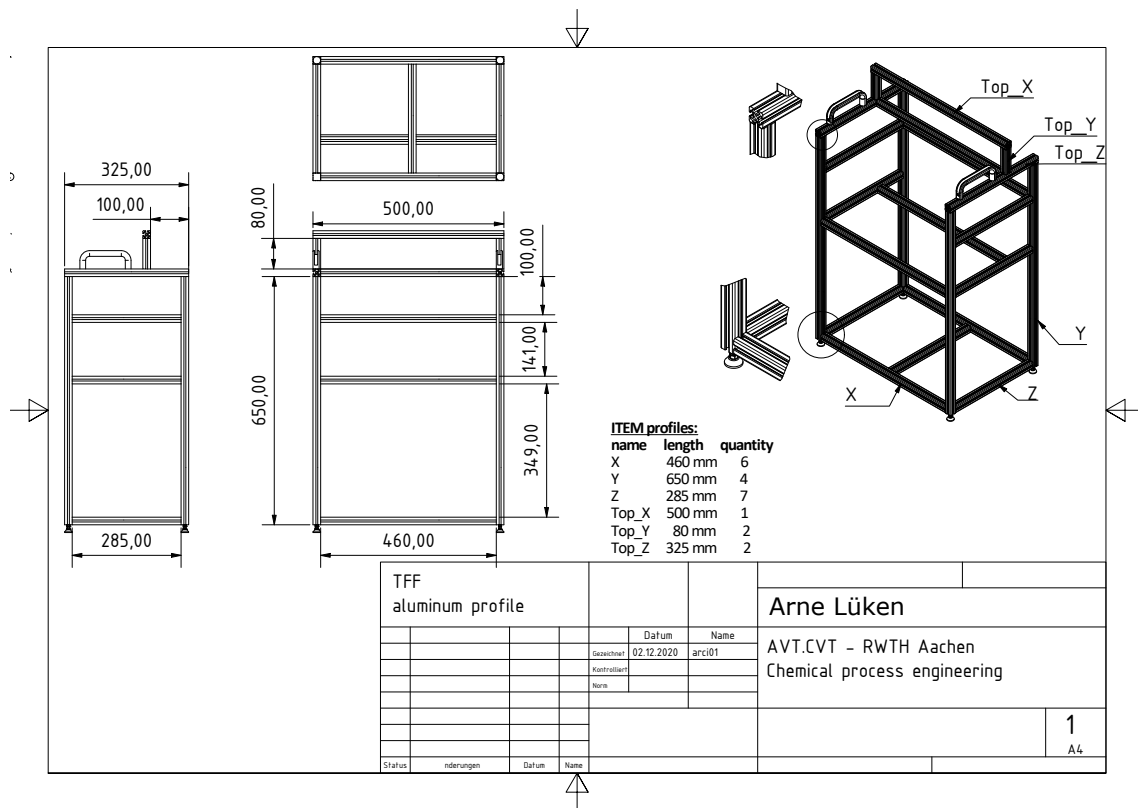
CAD-drawing of the aluminum cage assembly. Find the high quality image in the online repository
